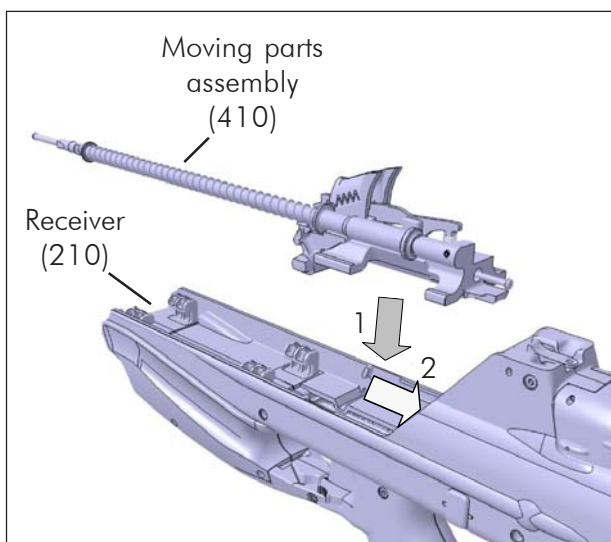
o - Reassembly of the moving parts assembly (410)
